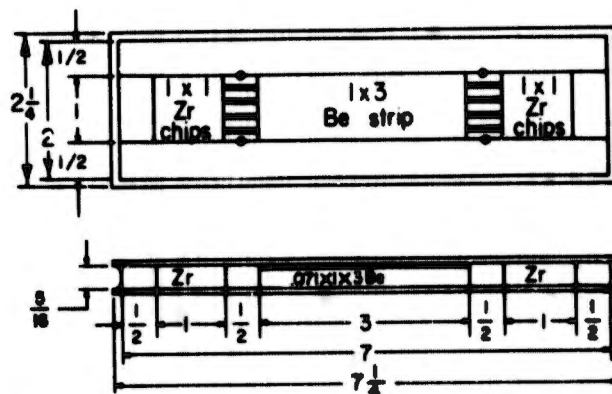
MODIFIED LAP-BOND ASSEMBLY⁽¹⁹⁾
